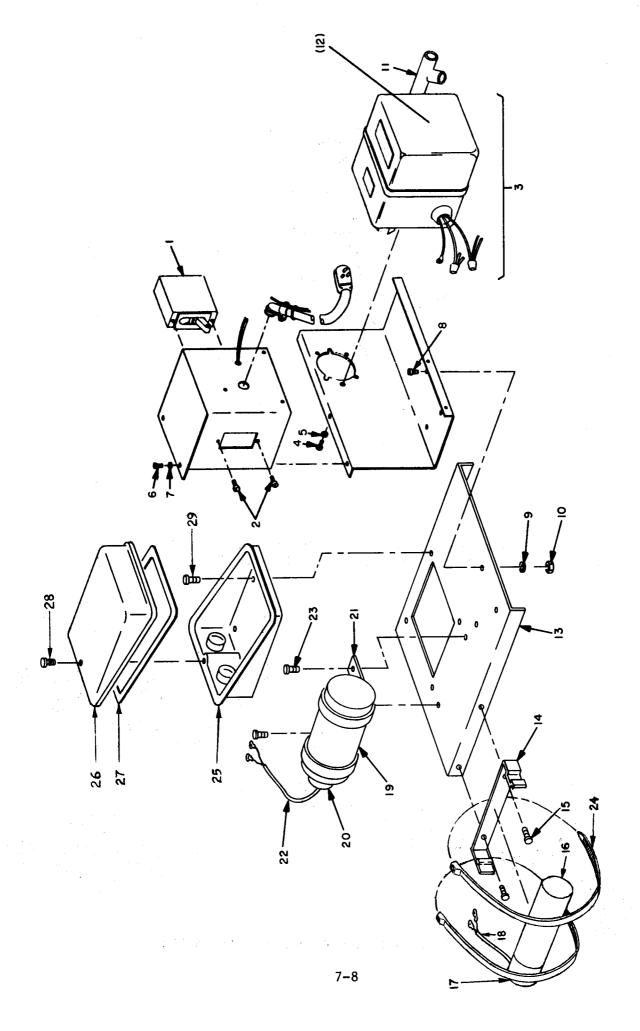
Pressure Switch and Bracket Assembly, Part No. 88006
